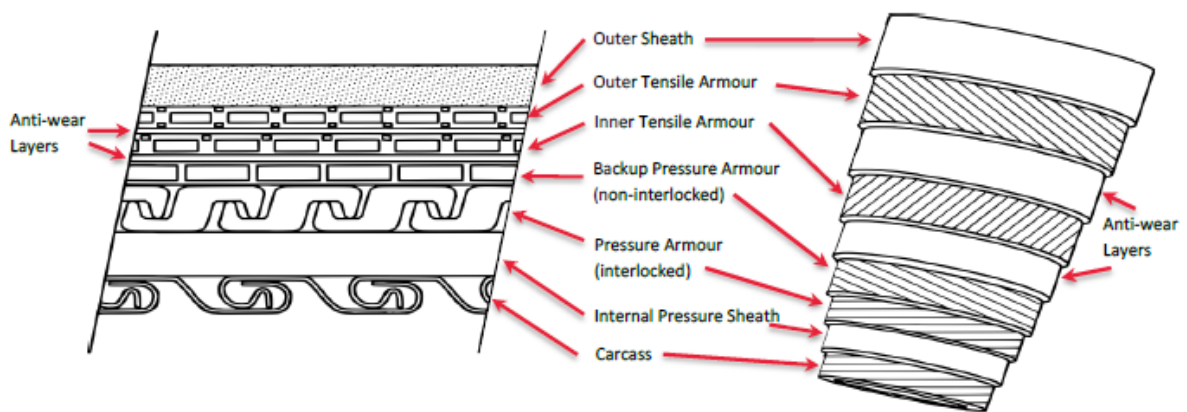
Unbonded Flexible Pipe Cross Section [26]
